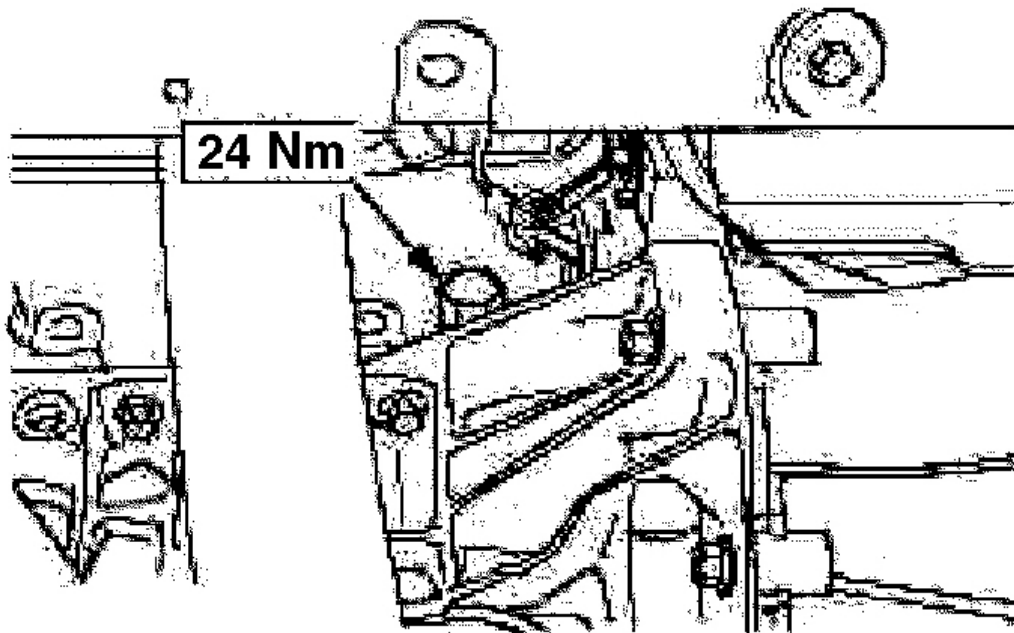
Installing Intake Camshaft Pulley Blanking Plug
